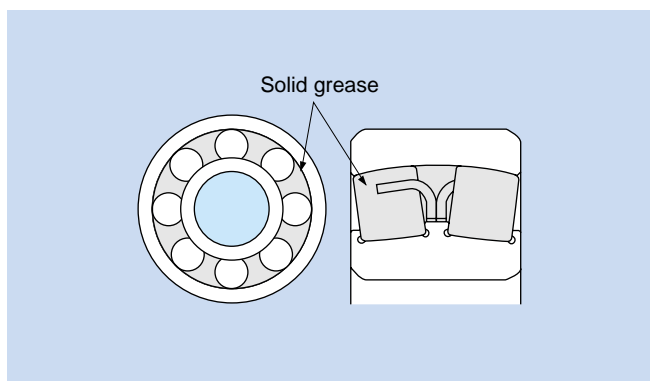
Spherical roller bearing with full-pack solid grease (Standard for spherical roller bearings)
